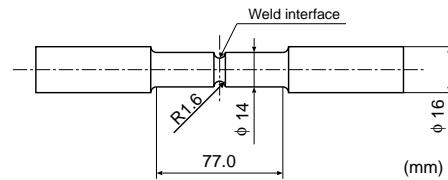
Shape and dimensions of tensile test specimen (S15CK).
